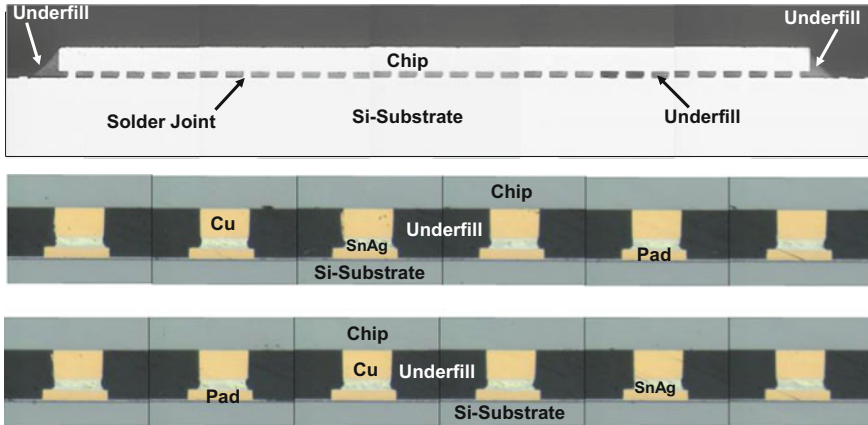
Typical cross section of the stencil-printed underfill for flip chip on Si-wafer assembly
